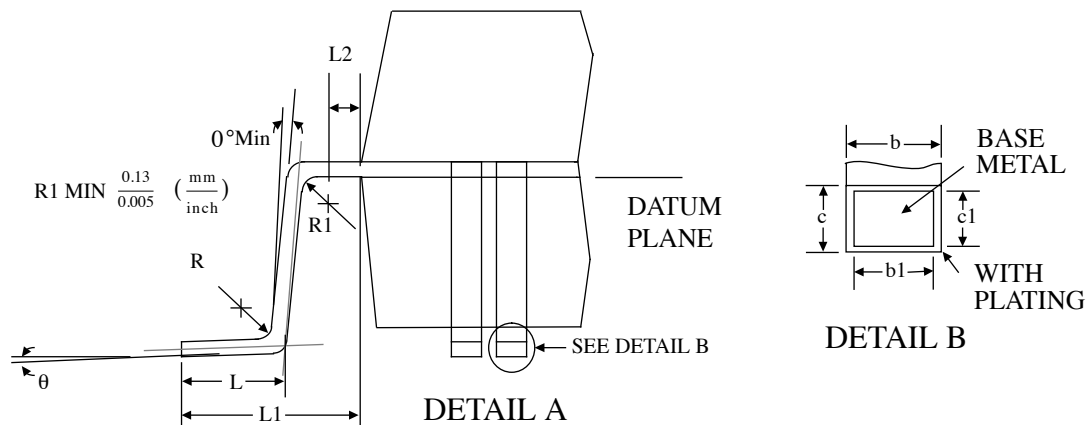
Mechanical Packaging Specifications (Detail A and B)
